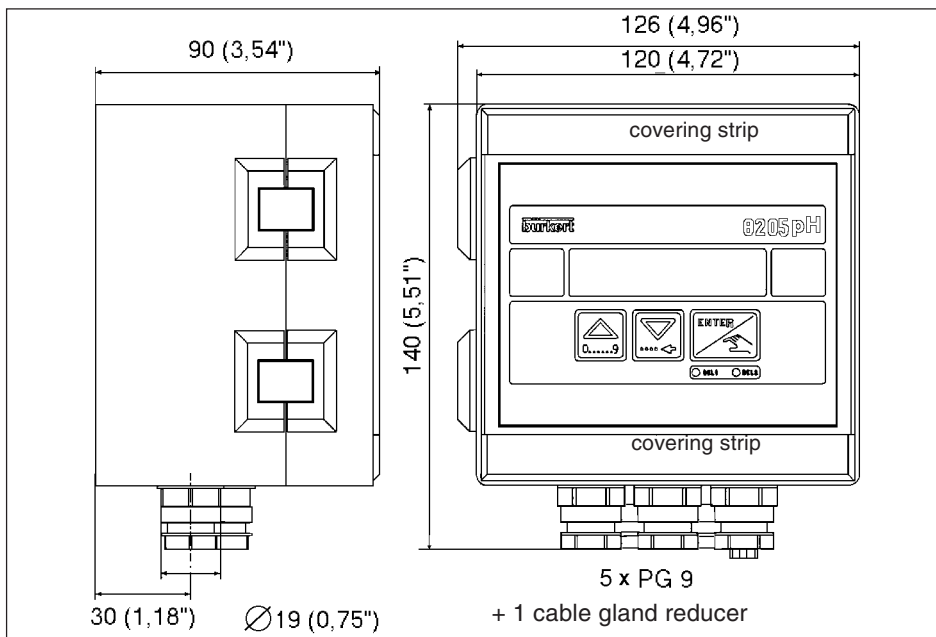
Dimensions pH transmitter type 8205 wall-mounted version
